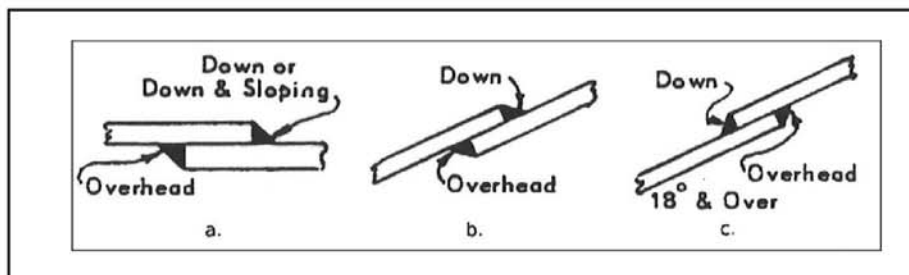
Typical detail for a lap weld, welded on both sides
